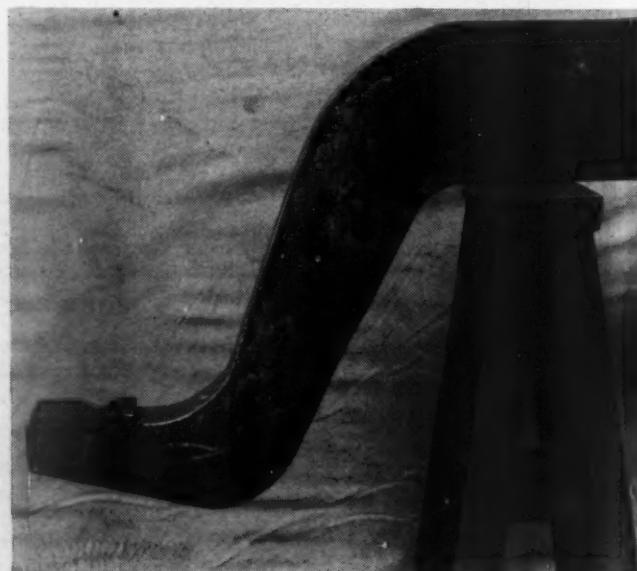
Type of wear pad which is welded to the equalizer end
